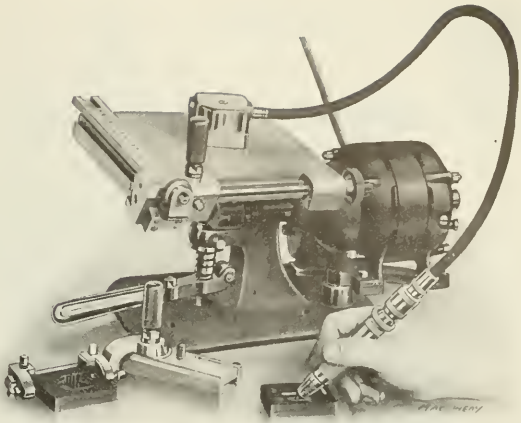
Anderson Die Forming Machine with Flexible Shaft Connection to Tool
